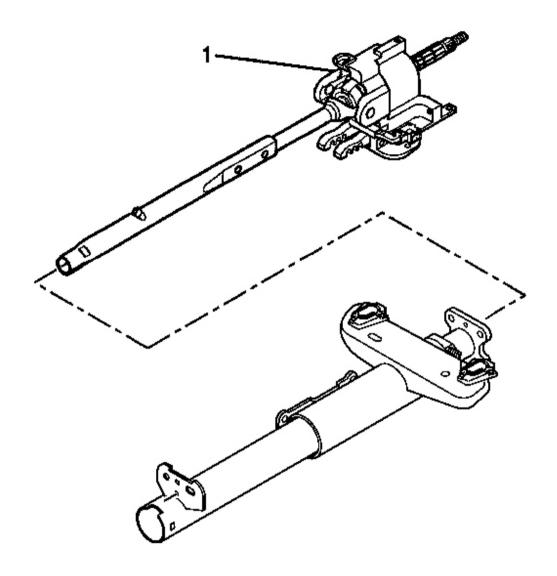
Steering Column Tilt Head Housing Assembly Courtesy of GENERAL MOTORS CORP.
